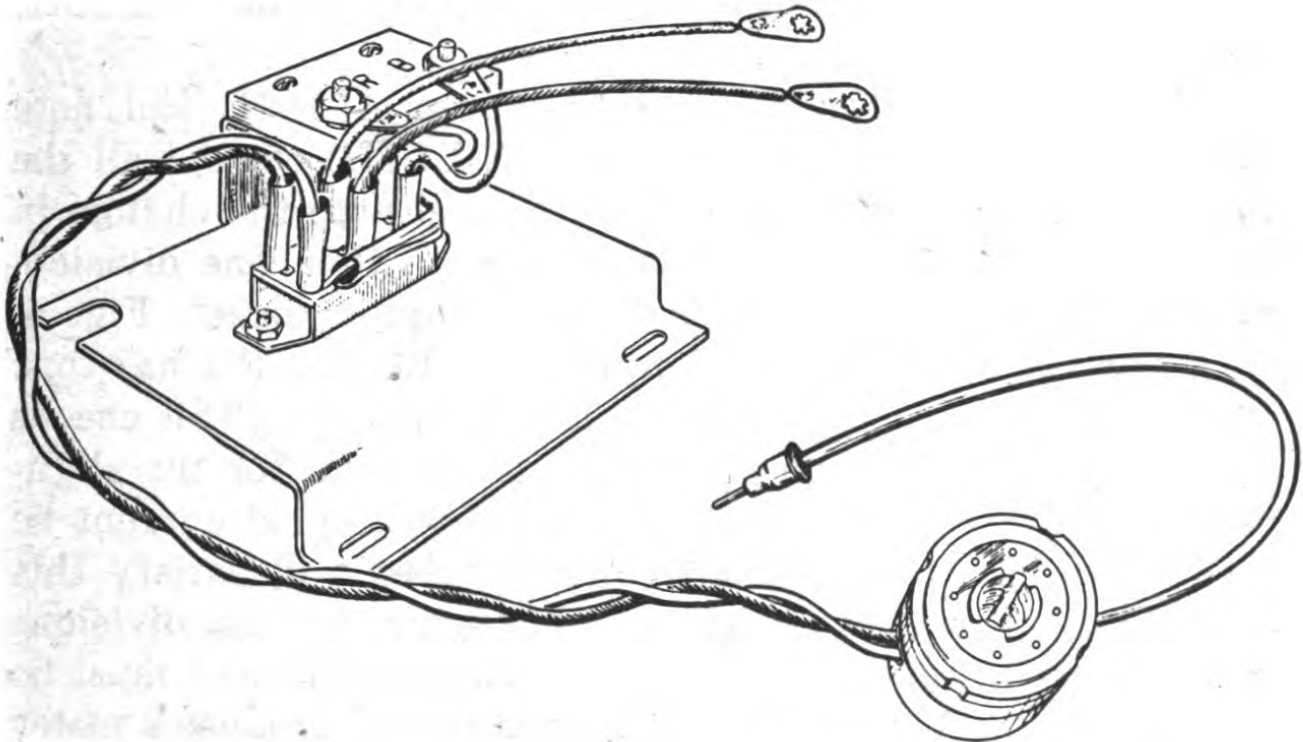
ADAPTER M-399, BOTTOM VIEW
